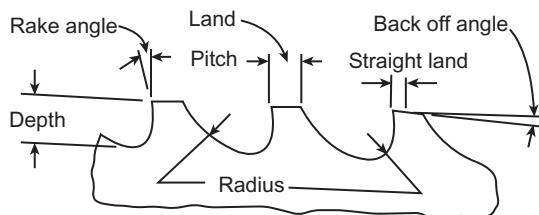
Broach tooth form. Courtesy: American Broach and Machine Division, Sundstrand Machine Tools Company.
